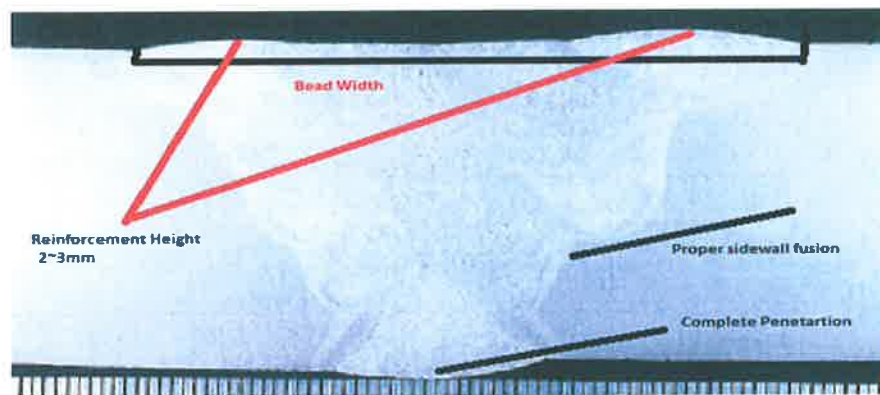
Macrograph Examination of final weld (SAW)
